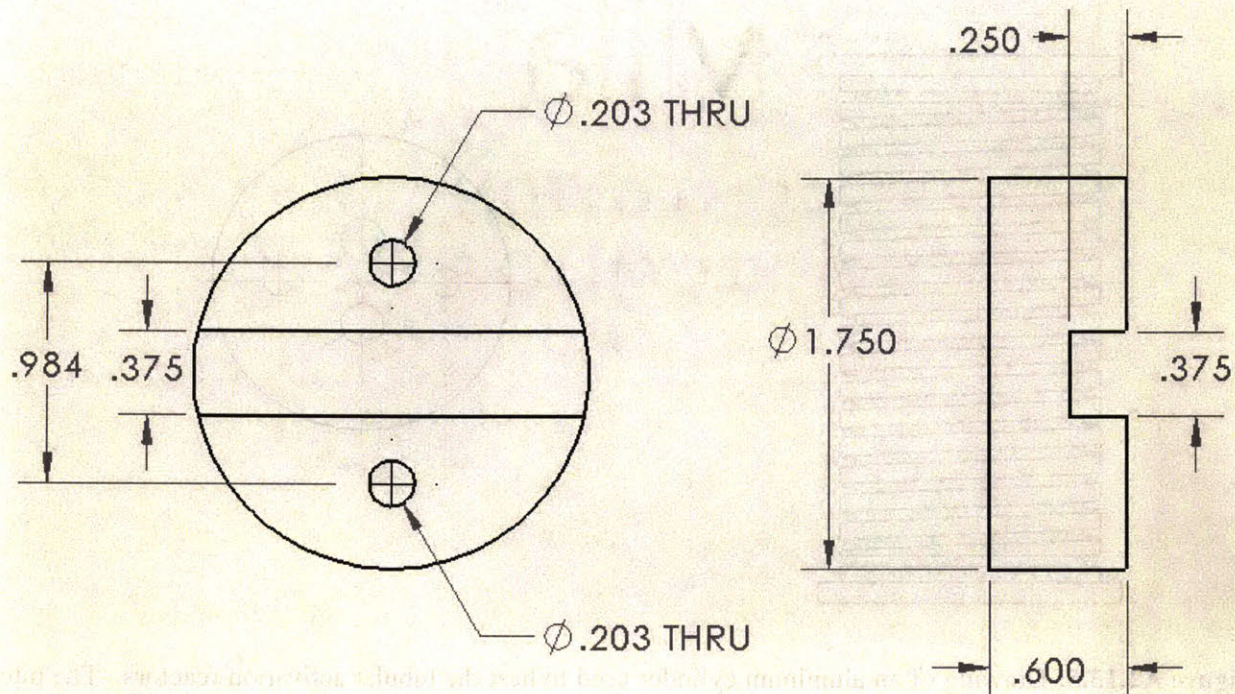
Drawing of the adaptor used to attach 1/8" tubing to the inlet of 50mL/min pump heads. Material was Delrin.
